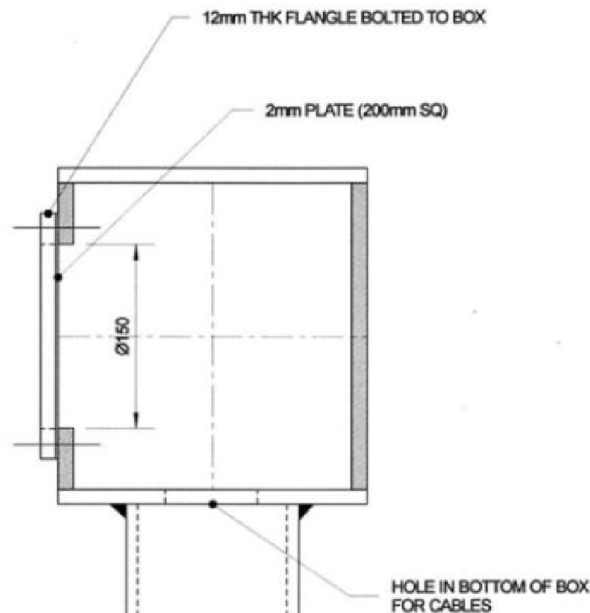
Design of Heavy Structural Boxes (Section Detail View through Box)
